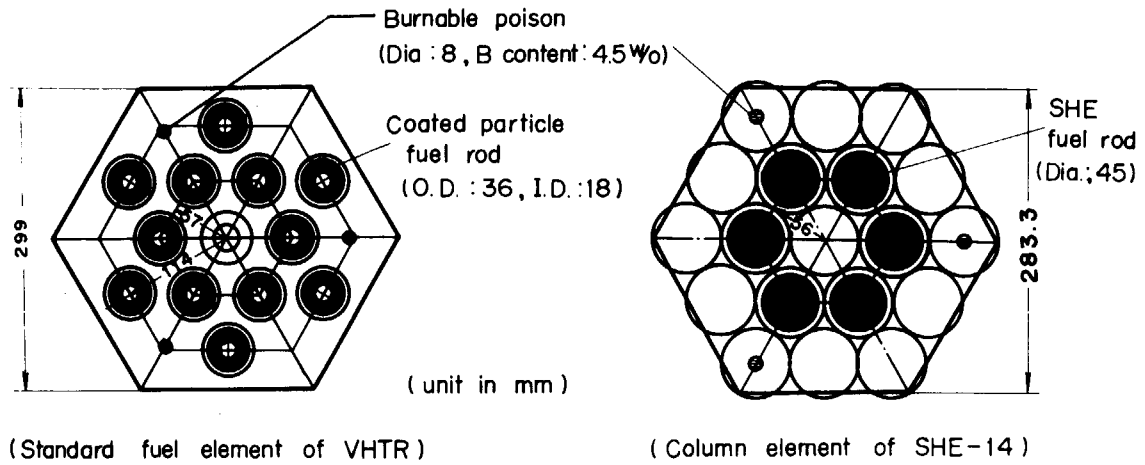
Cross sections of standard fuel element of VHTR and column element of SHE-14 core
